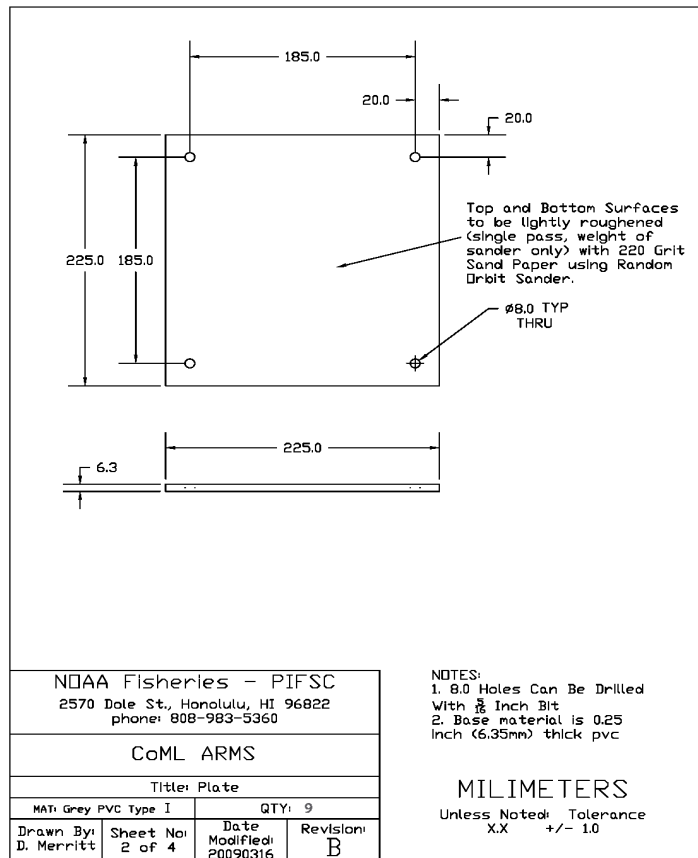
Technical drawing for manufacture of PVC layering plates.
